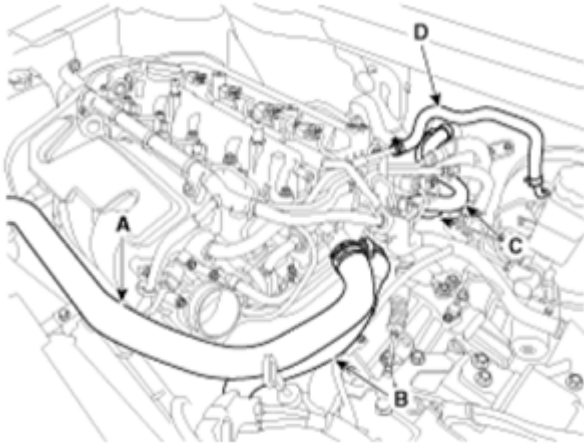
Radiator Upper/Lower Hose, Heater & Brake Booster Vacuum Hoses
